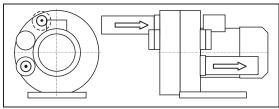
2BH722 ... 2BH762 (two-impeller pumpmotor units with two-stage design)
